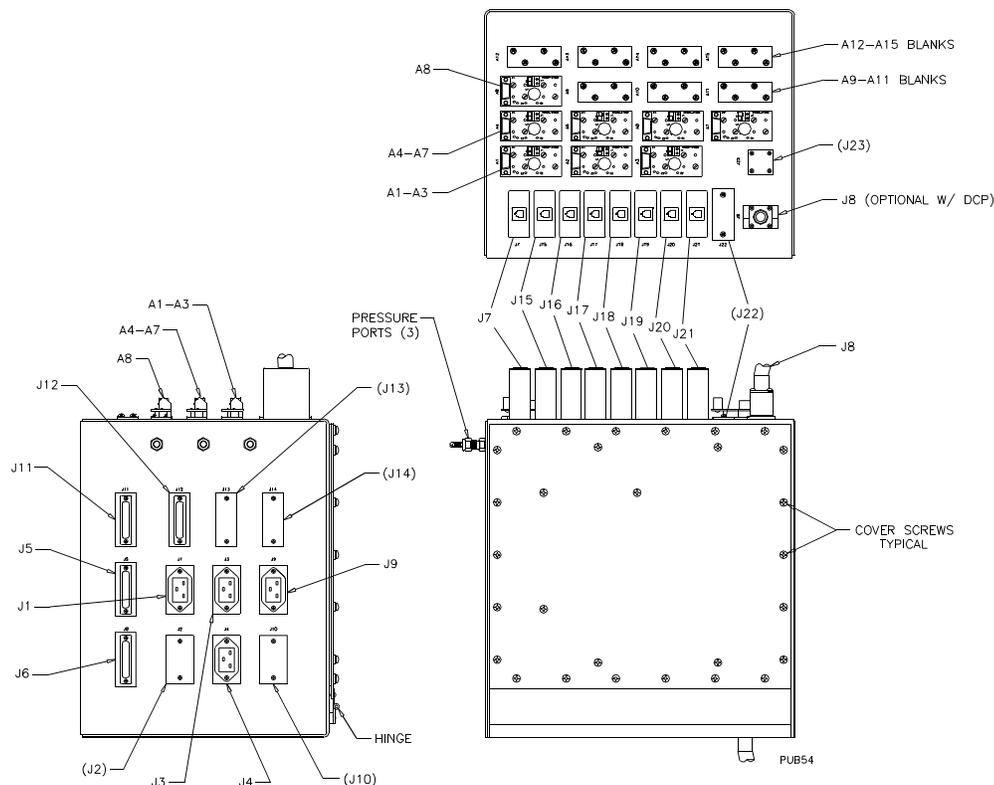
Faraday Box Assembly A3, Parts Location Diagram
